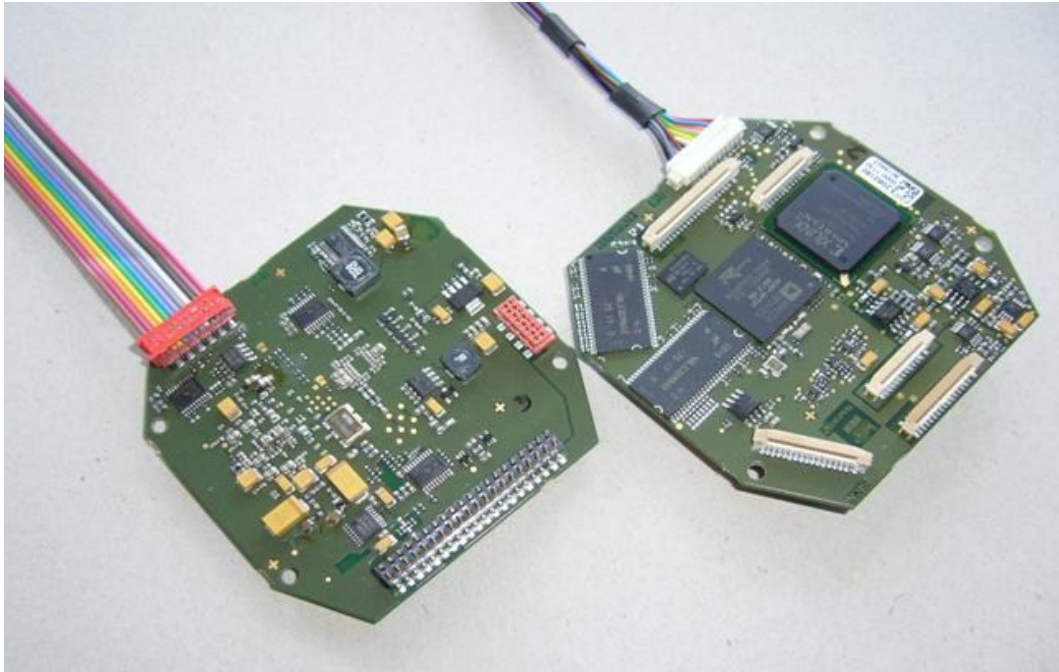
Bottom side (left) and top side (right) of the PCB System.
